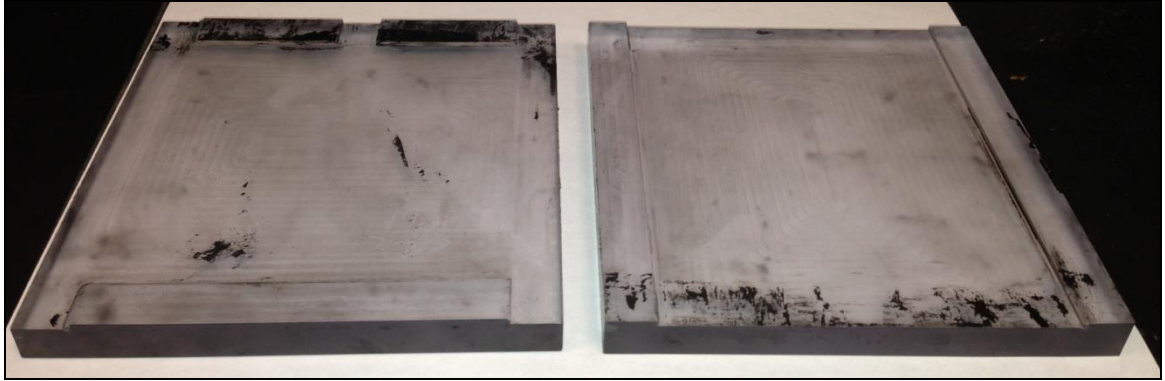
Polycarbonate mold. The black material on the surface of the polycarbonate mold above is *CB* filled polyurethane that cured to the mold when the mold release failed.
